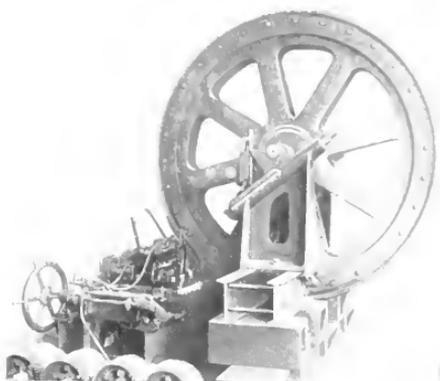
Welding End Ring of Rotor, 36-pole, 1400-h.p. Induction Motor
